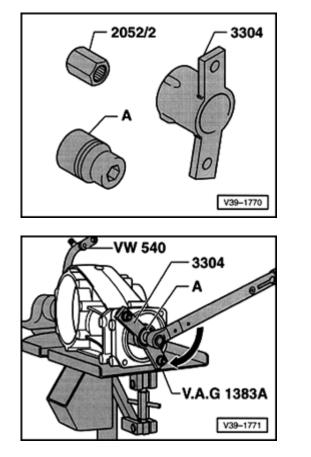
Tool to loosen and tighten pinion shaft nut A- 32 mm socket
